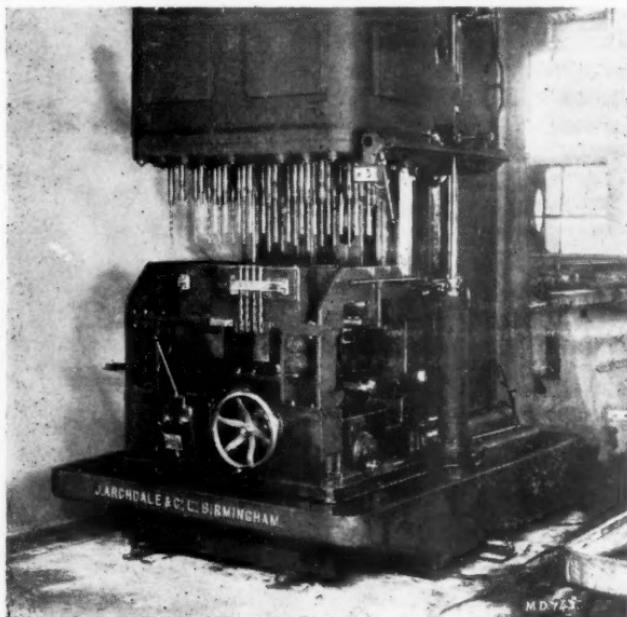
Archdale, Size 5, Multi Drilling Machine.
